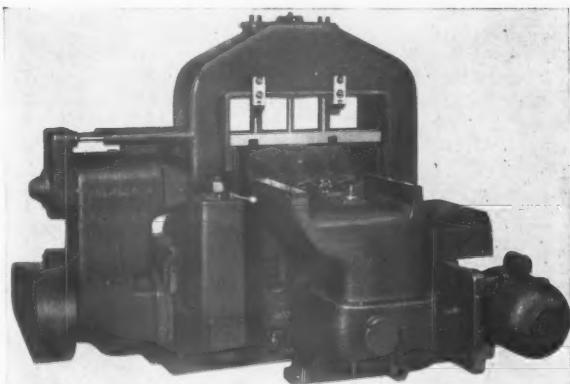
New and novel Rigidmil with hydraulic work-handling and automatic table cycle for machining cylinder block shown in Fig. 1.
